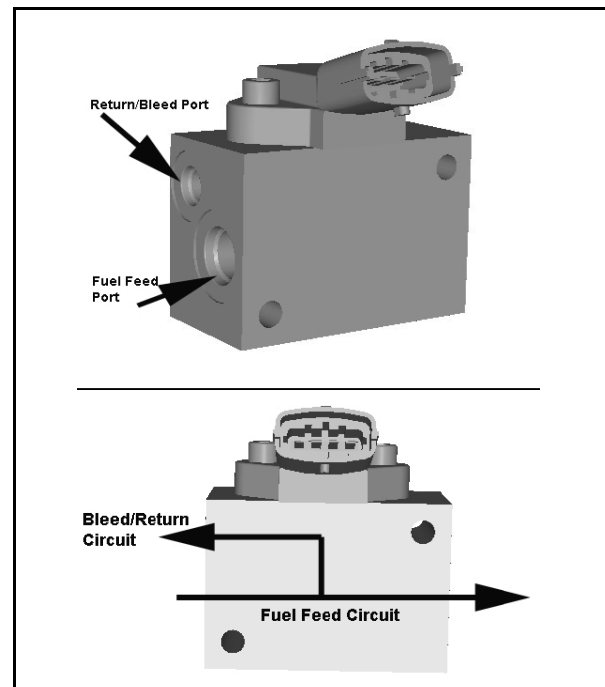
Gasoline Fuel Pressure and Temperature Manifold Assembly
